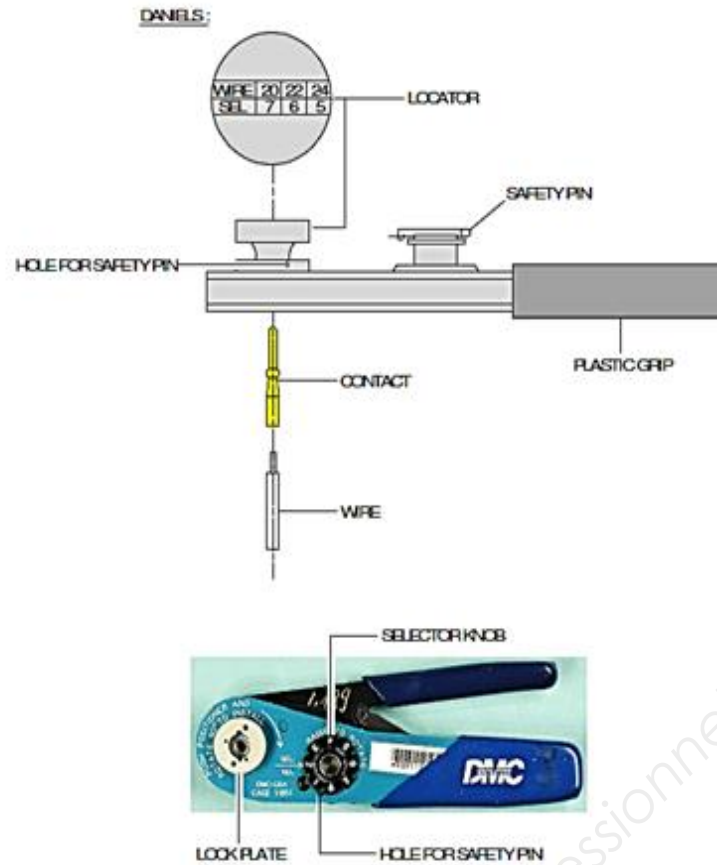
(Sheet 1) / 20-25-22 - Hand Crimping Tool M22520-2-01 and M22520-7-01
